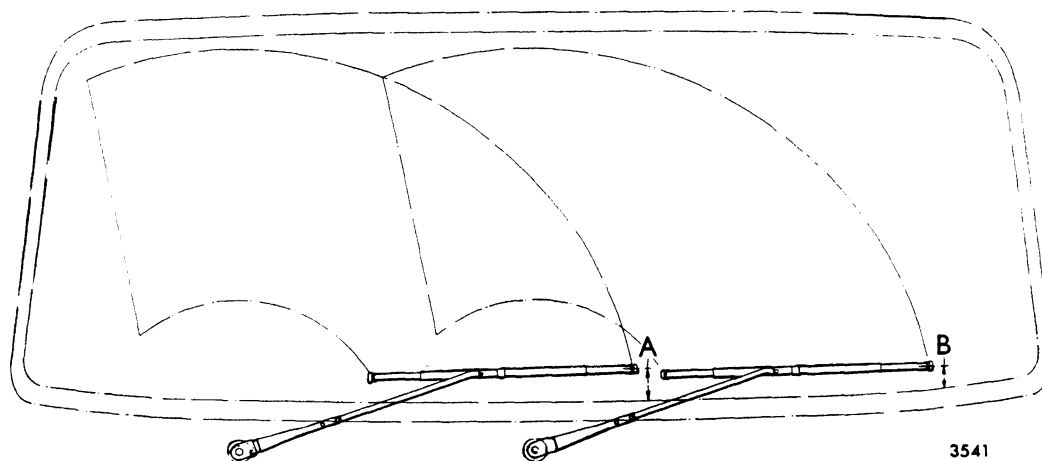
Arrangement of windshield wipers. The arms and blades are shown in the parking position
